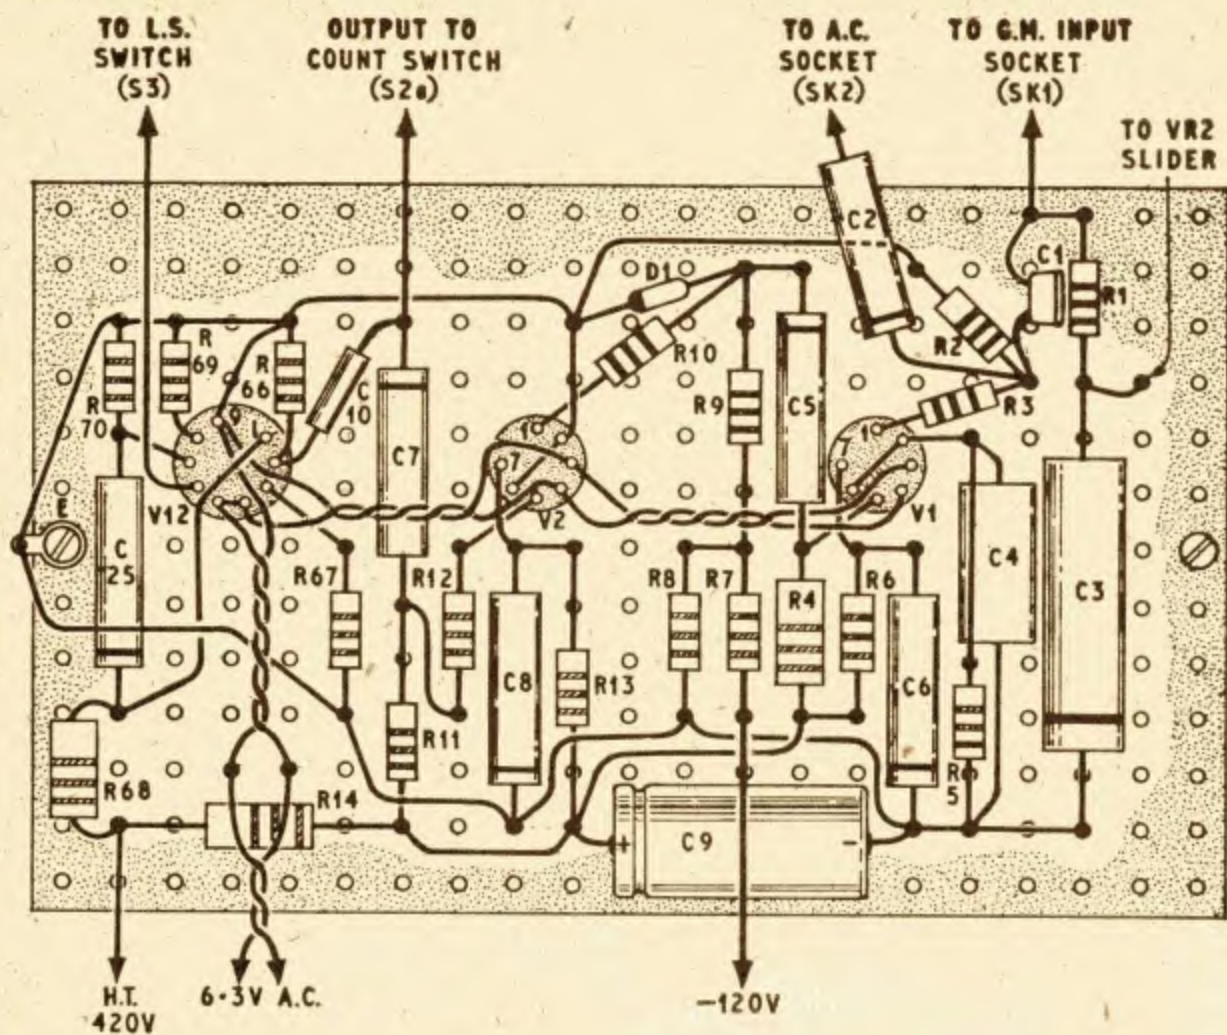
Input and loudspeaker amplifier tag board showing layout of components and wiring
